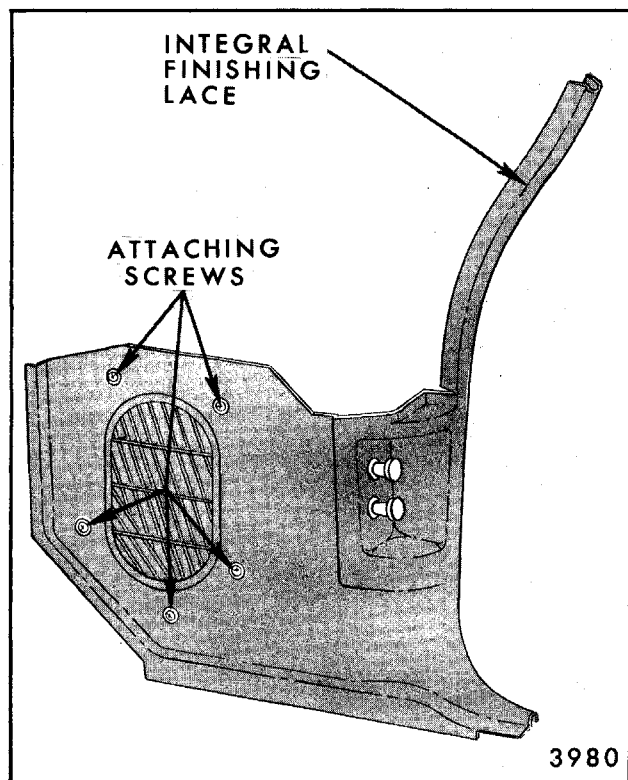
Shroud Side Finishing Panel - "F" Styles
